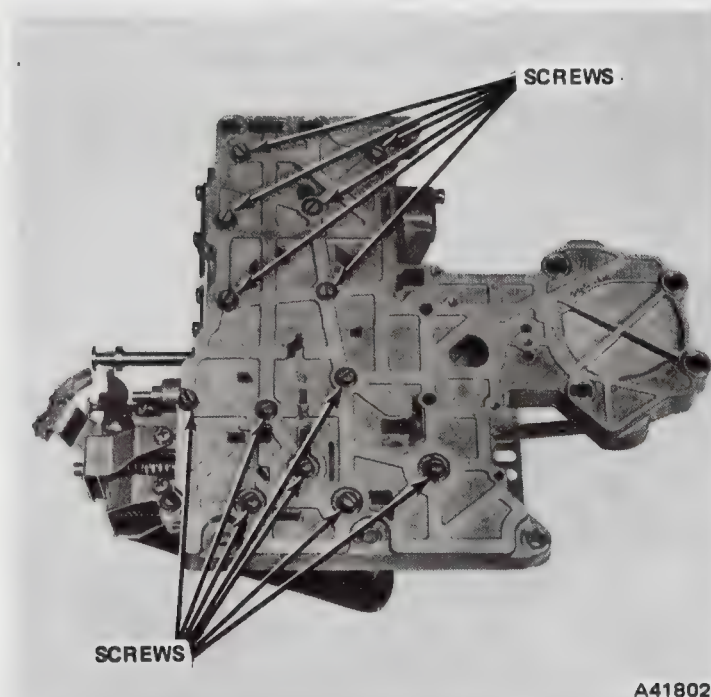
C-43 Transfer Plate Attaching Screw Location—Model 904
